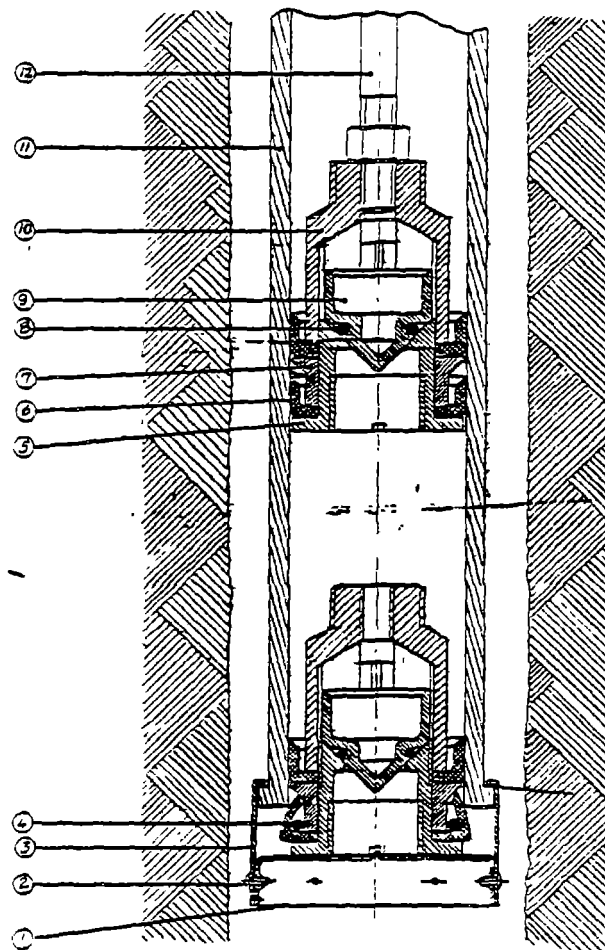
Design suggestion for open-type cylinder with extractable piston and foot-valve.
